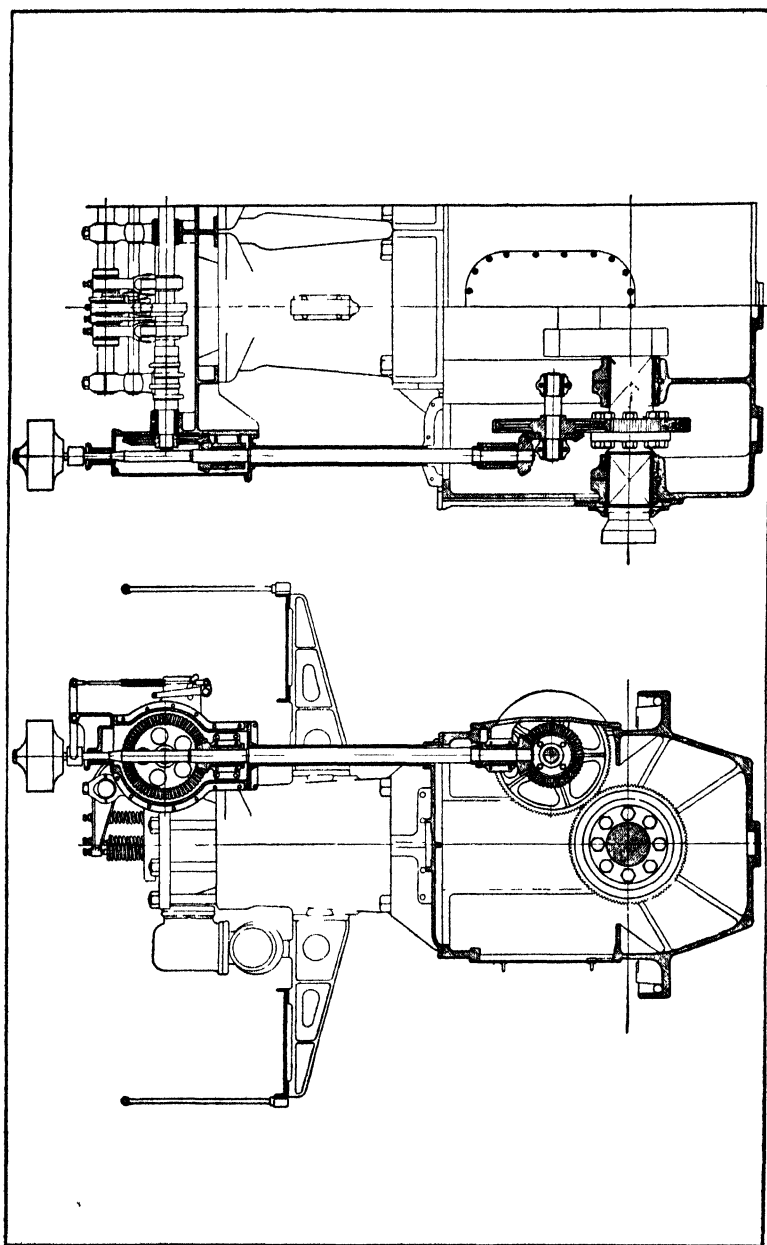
Method of Driving Camshaft of Worthington 4-Cycle Engines
